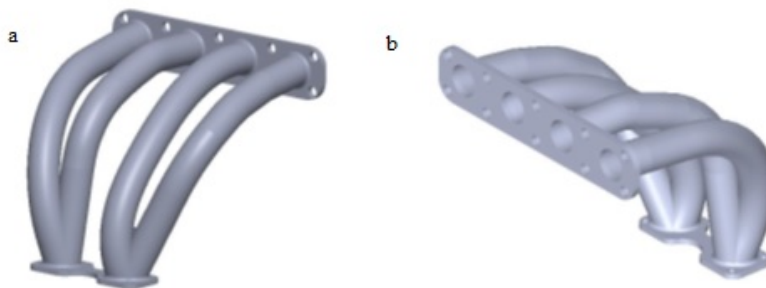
a) B type exhaust manifolds front view; b) back view [3]
